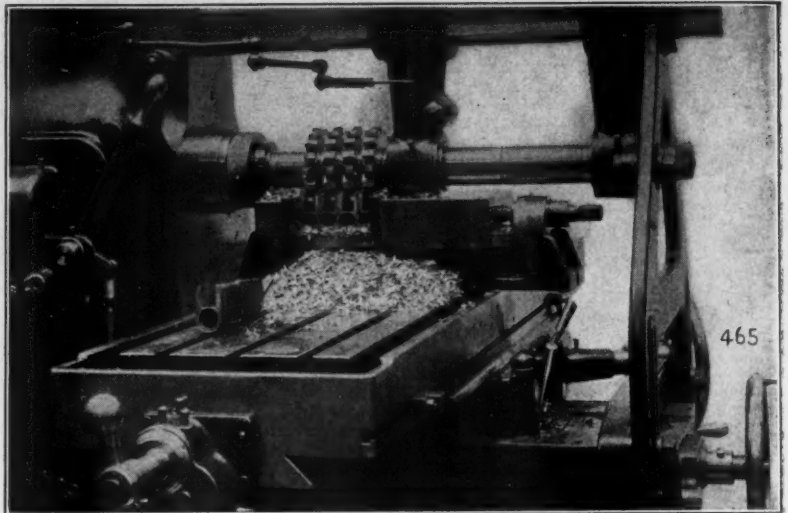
PLAIN HORIZONTAL MILLING MACHINE REMOVING  $8\frac{1}{8}$  CUBIC INCHES OF DROP-FORGED STEEL PER MINUTE.
